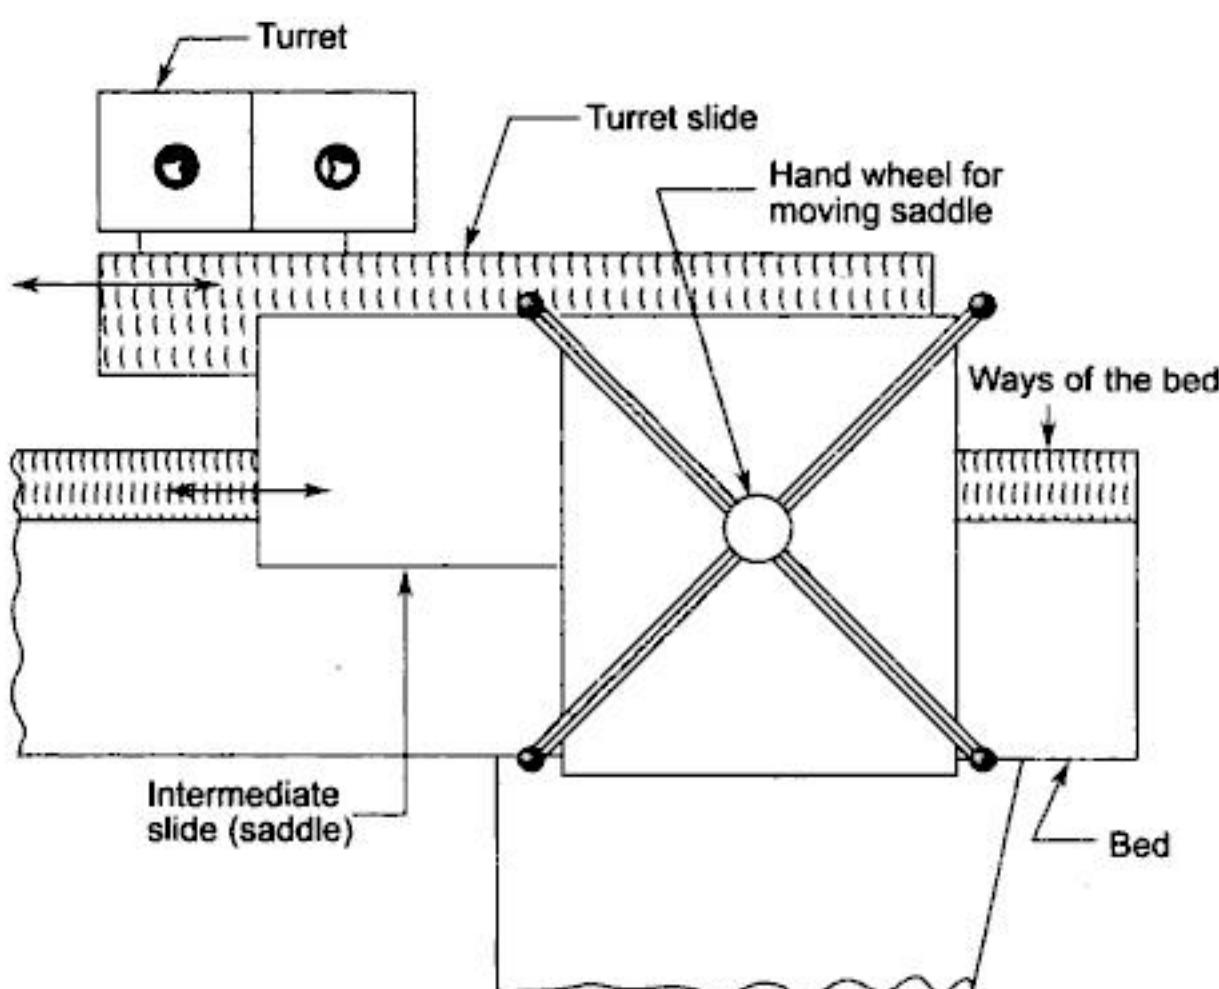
Intermediate slide arrangement in capstan lathe.
